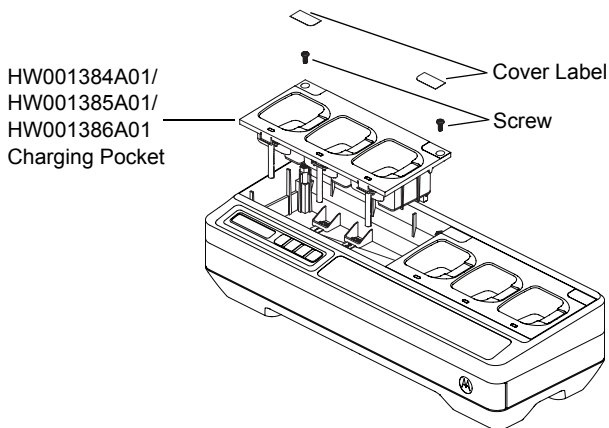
Installing and Removing HW001384A01/HW001385A01/
